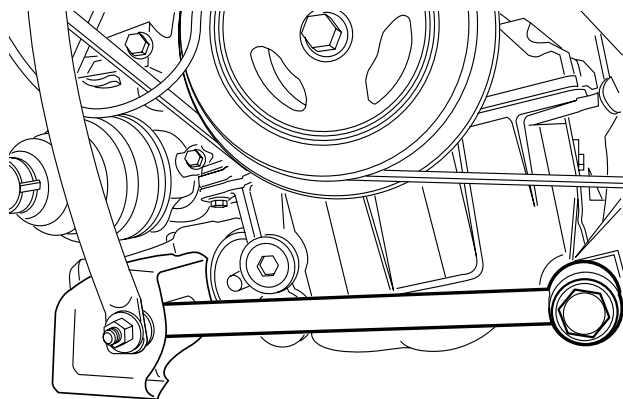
Torque struts are sometimes installed in place of engine mounts. The lower A/C bracket can bend and crack the oil pan.
